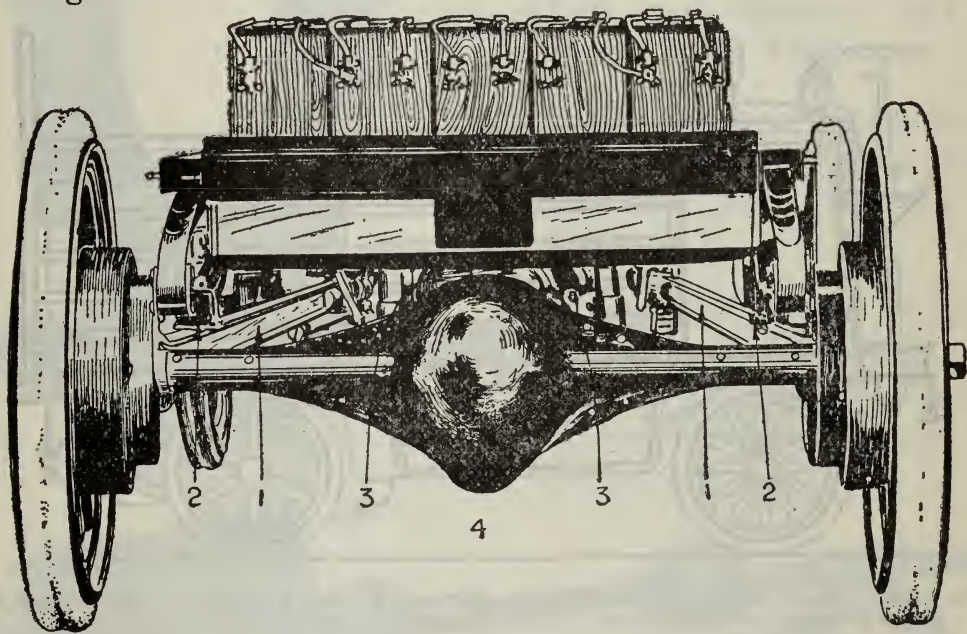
,079.—Rear view of Wood's chassis with battery showing the following features of construction: 1, radius rods extending from rear axle to sub-chassis frame; 2, rear springs rest on radius rods, instead of on rear axle; 3, motor, showing ball and socket spring suspension; 4, worm drive, showing location of worm below rear axle.
